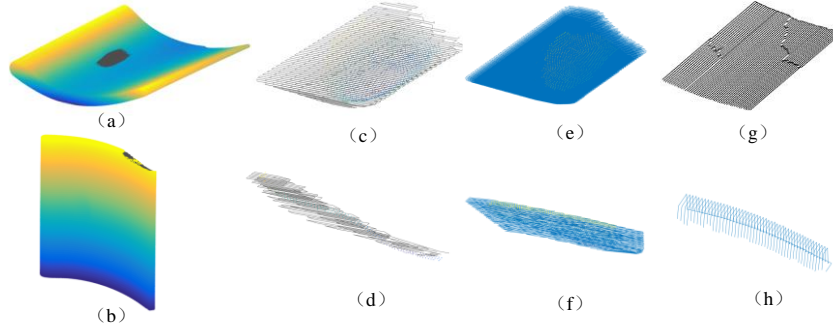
Generation of tool path for repairing blade. a the blade to repair Defect II; b the blade to repair Defect I; c pre-machining process of Defect II; d pre-machining process of Defect I; e AM process of Defect II; f AM process of Defect I; g post process of Defect II; h post process of Defect I.
